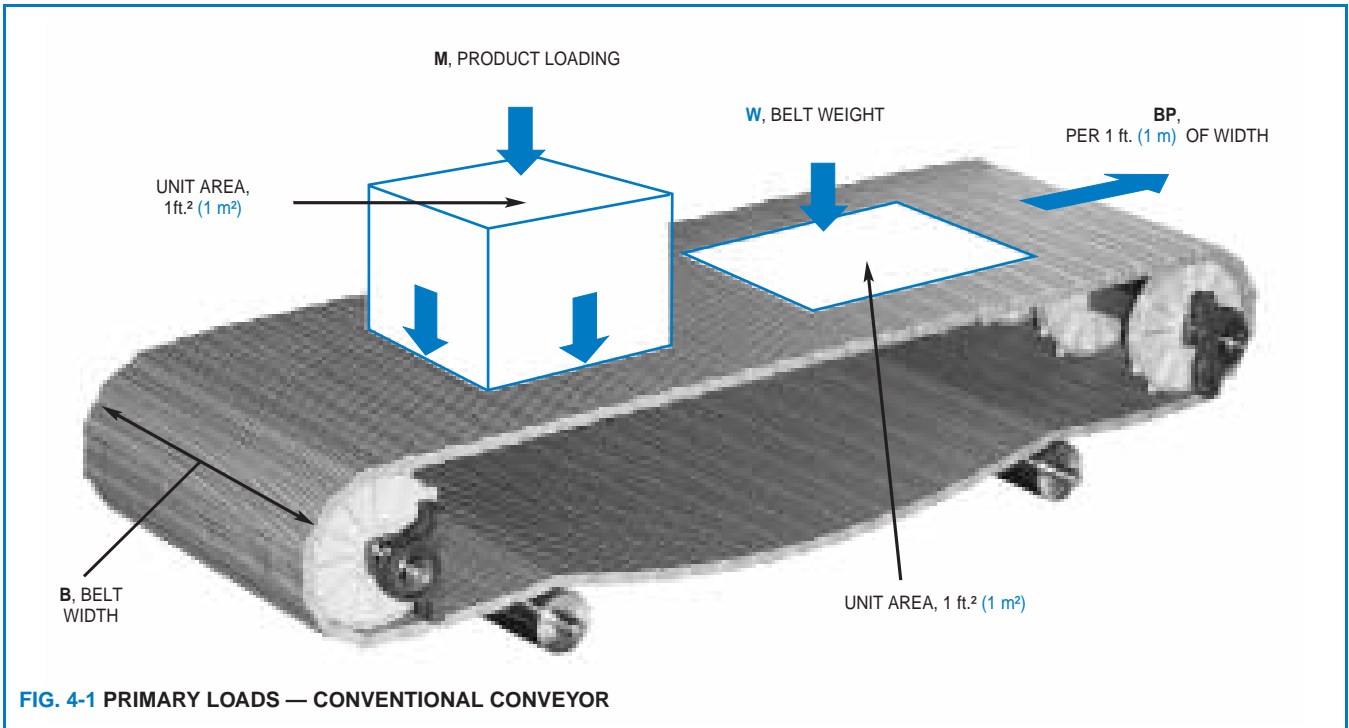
PRIMARY LOADS — CONVENTIONAL CONVEYOR
